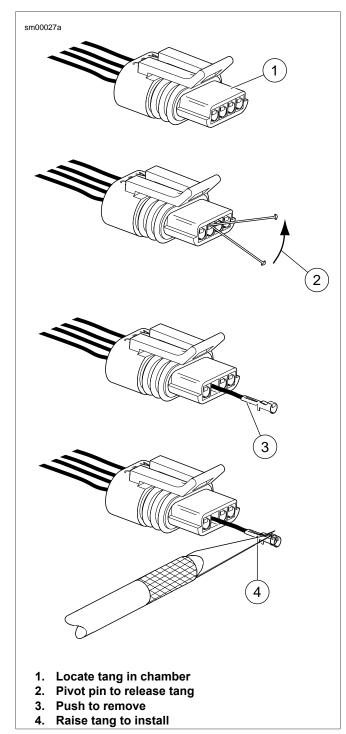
Delphi 150 Metri-Pack Sealed Connector: Pull-to-Seat
